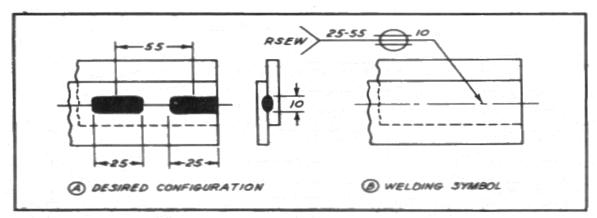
Expressing an intermittent weld. Units are in millimeters.
